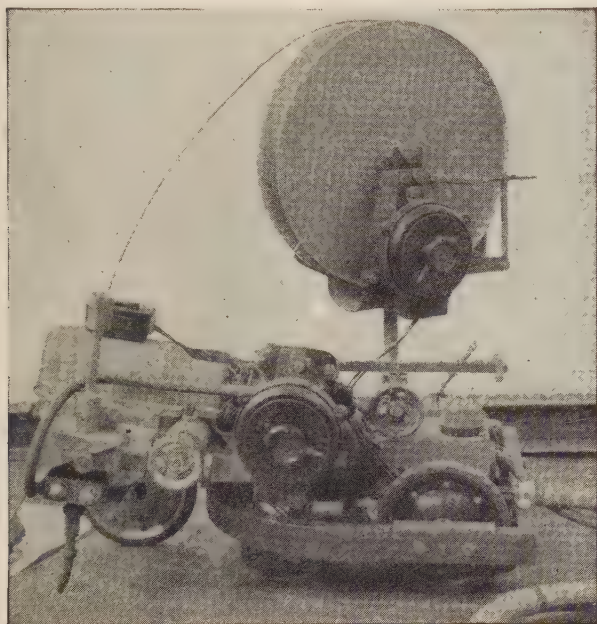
SELF-PROPELLED AUTOMATIC ARC WELDER FOR WELDING FLOORS, TANKS, SHIP DECKS, ETC.
